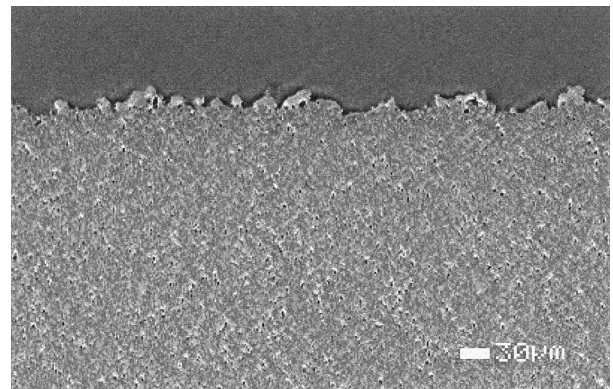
Cross-section through EDM machined surface of sialon-TiN composite under normal machining conditions with no arcing (recast layer still attached).
